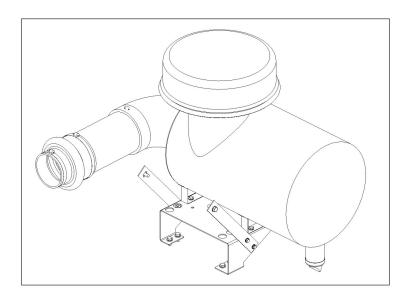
HEAVY DUTY AIR CLEANER ASSEMBLY
